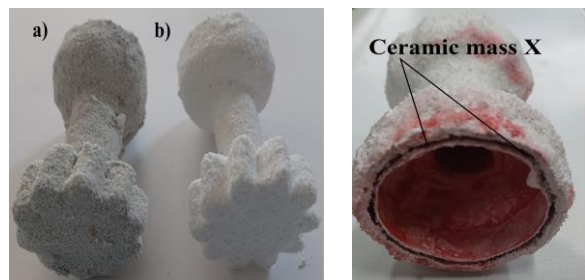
Test castings subjected to knocking-out on vibratory table: (a) internal side of bushing casting; (b) ceramic mould knocked out from opening of bushing (ceramic core)
